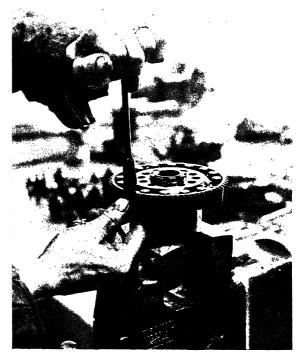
(above).—Assembling clutch blocks, intermediate gear centre and side plates.
